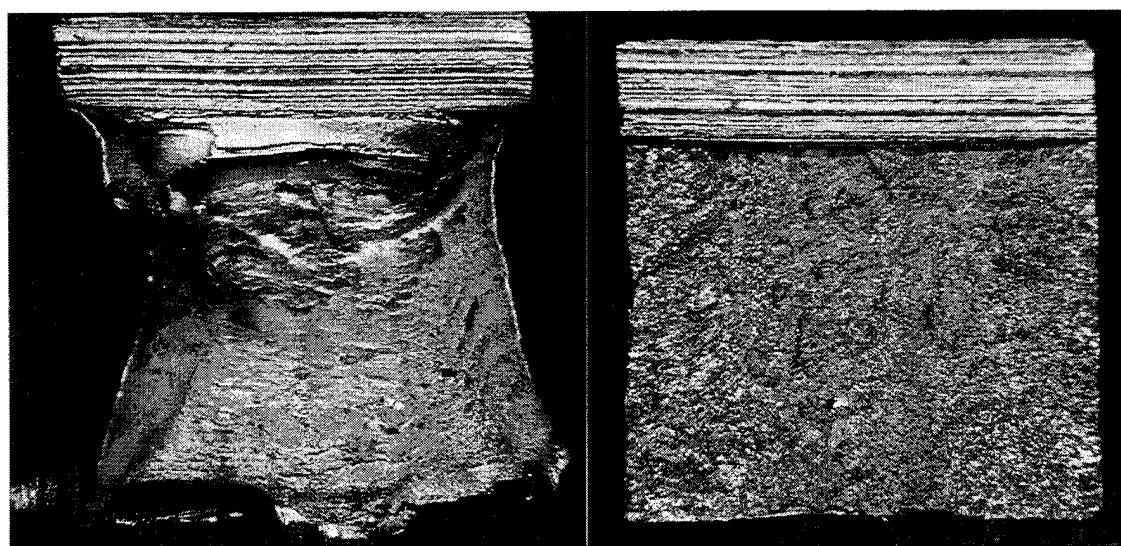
MV2 Ductile and Brittle Fracture Surfaces (6.4 x)
